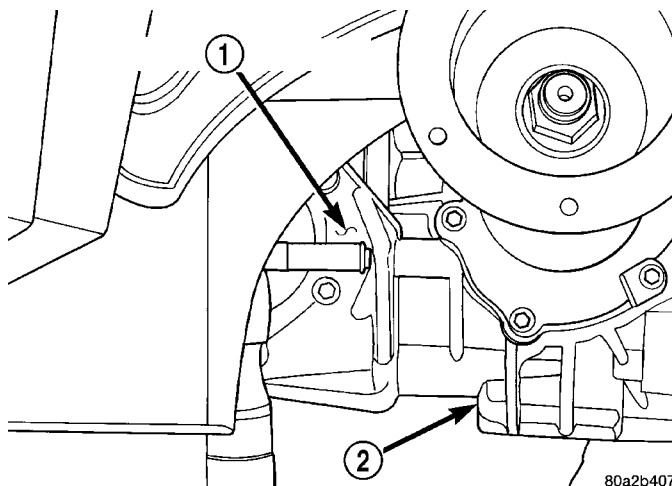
Remove Rear P.T.U. Bracket Bolts
